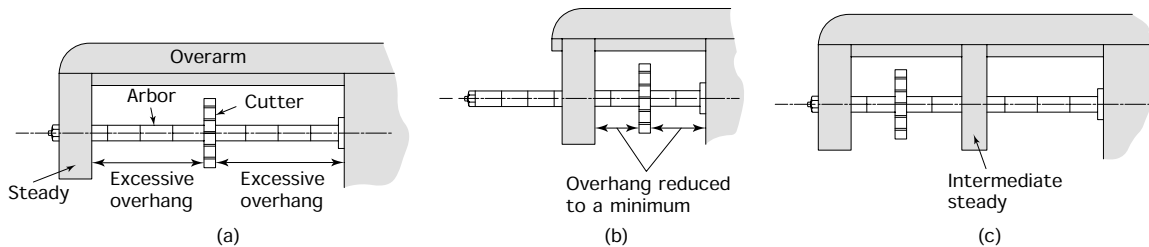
Correct use of overarm steady: (a) bad mounting; (b) and (c) good mounting
